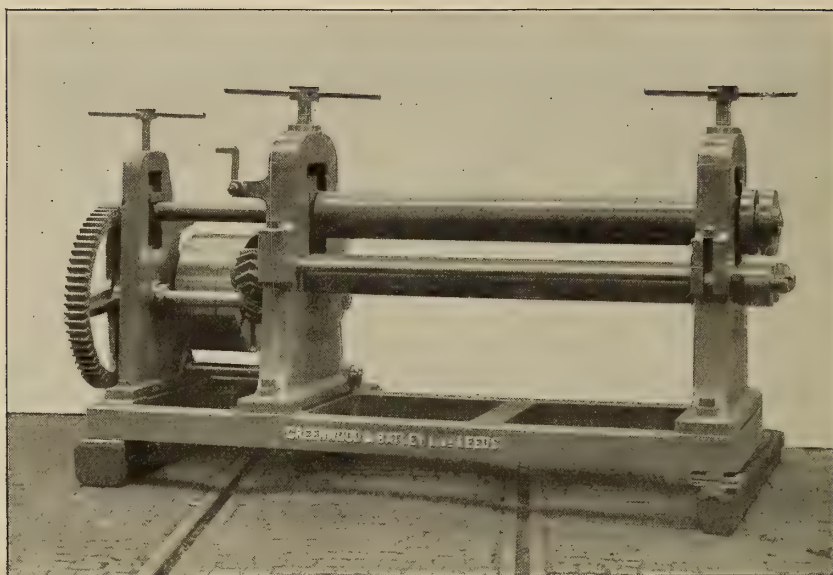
ANOTHER FORM OF PLATE BENDING MACHINE.
